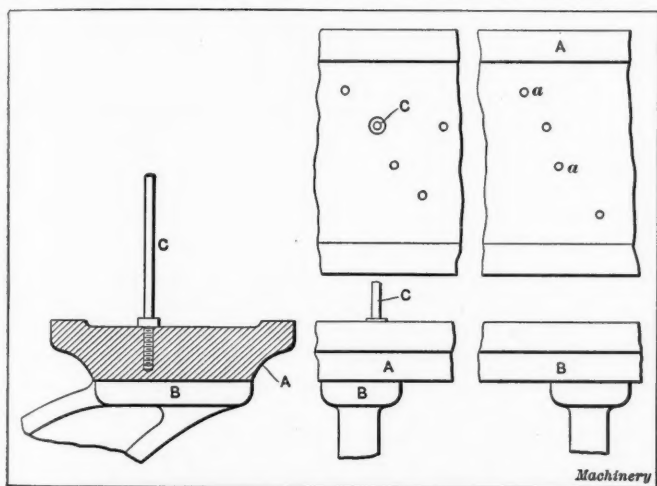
Machine Bed for which the Drilling and Tapping Fixture was designed
